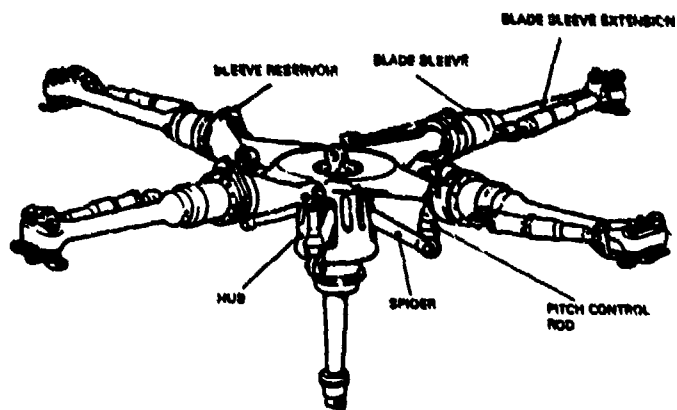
ROTOR HEAD OF WESTLAND LYNX
